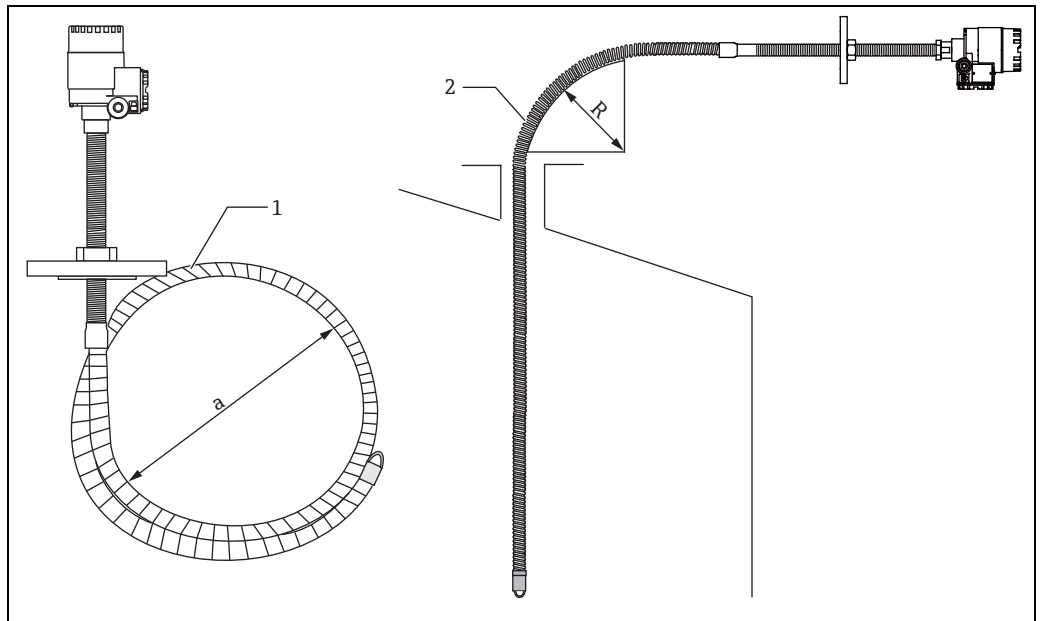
Handling of flexible tube 2, Unit of measurement: mm (in)
